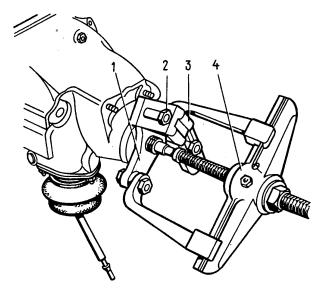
Removing Flexible Coupling Flange with Remover Tool A.40005/3/9B/9C:
